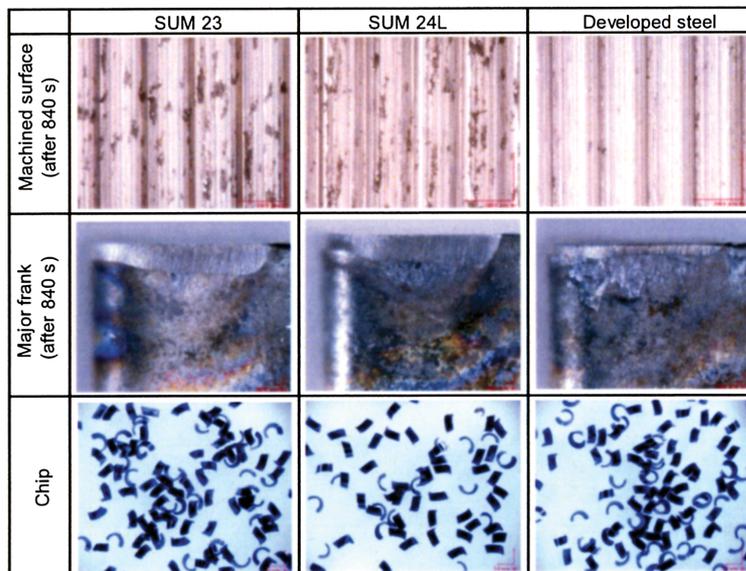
Optical micrograph of machined surface, tool wear, and chip
